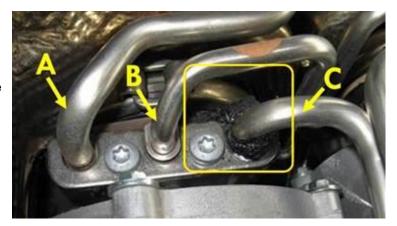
Black, encrusted coolant residue (outlined area), coolant feed pipe (A), oil feed pipe (B), and coolant return pipe (C).
